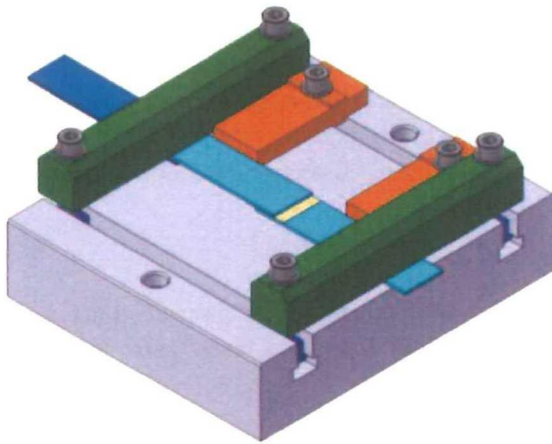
Fixture Z51414 in the single-side clamping configuration.
